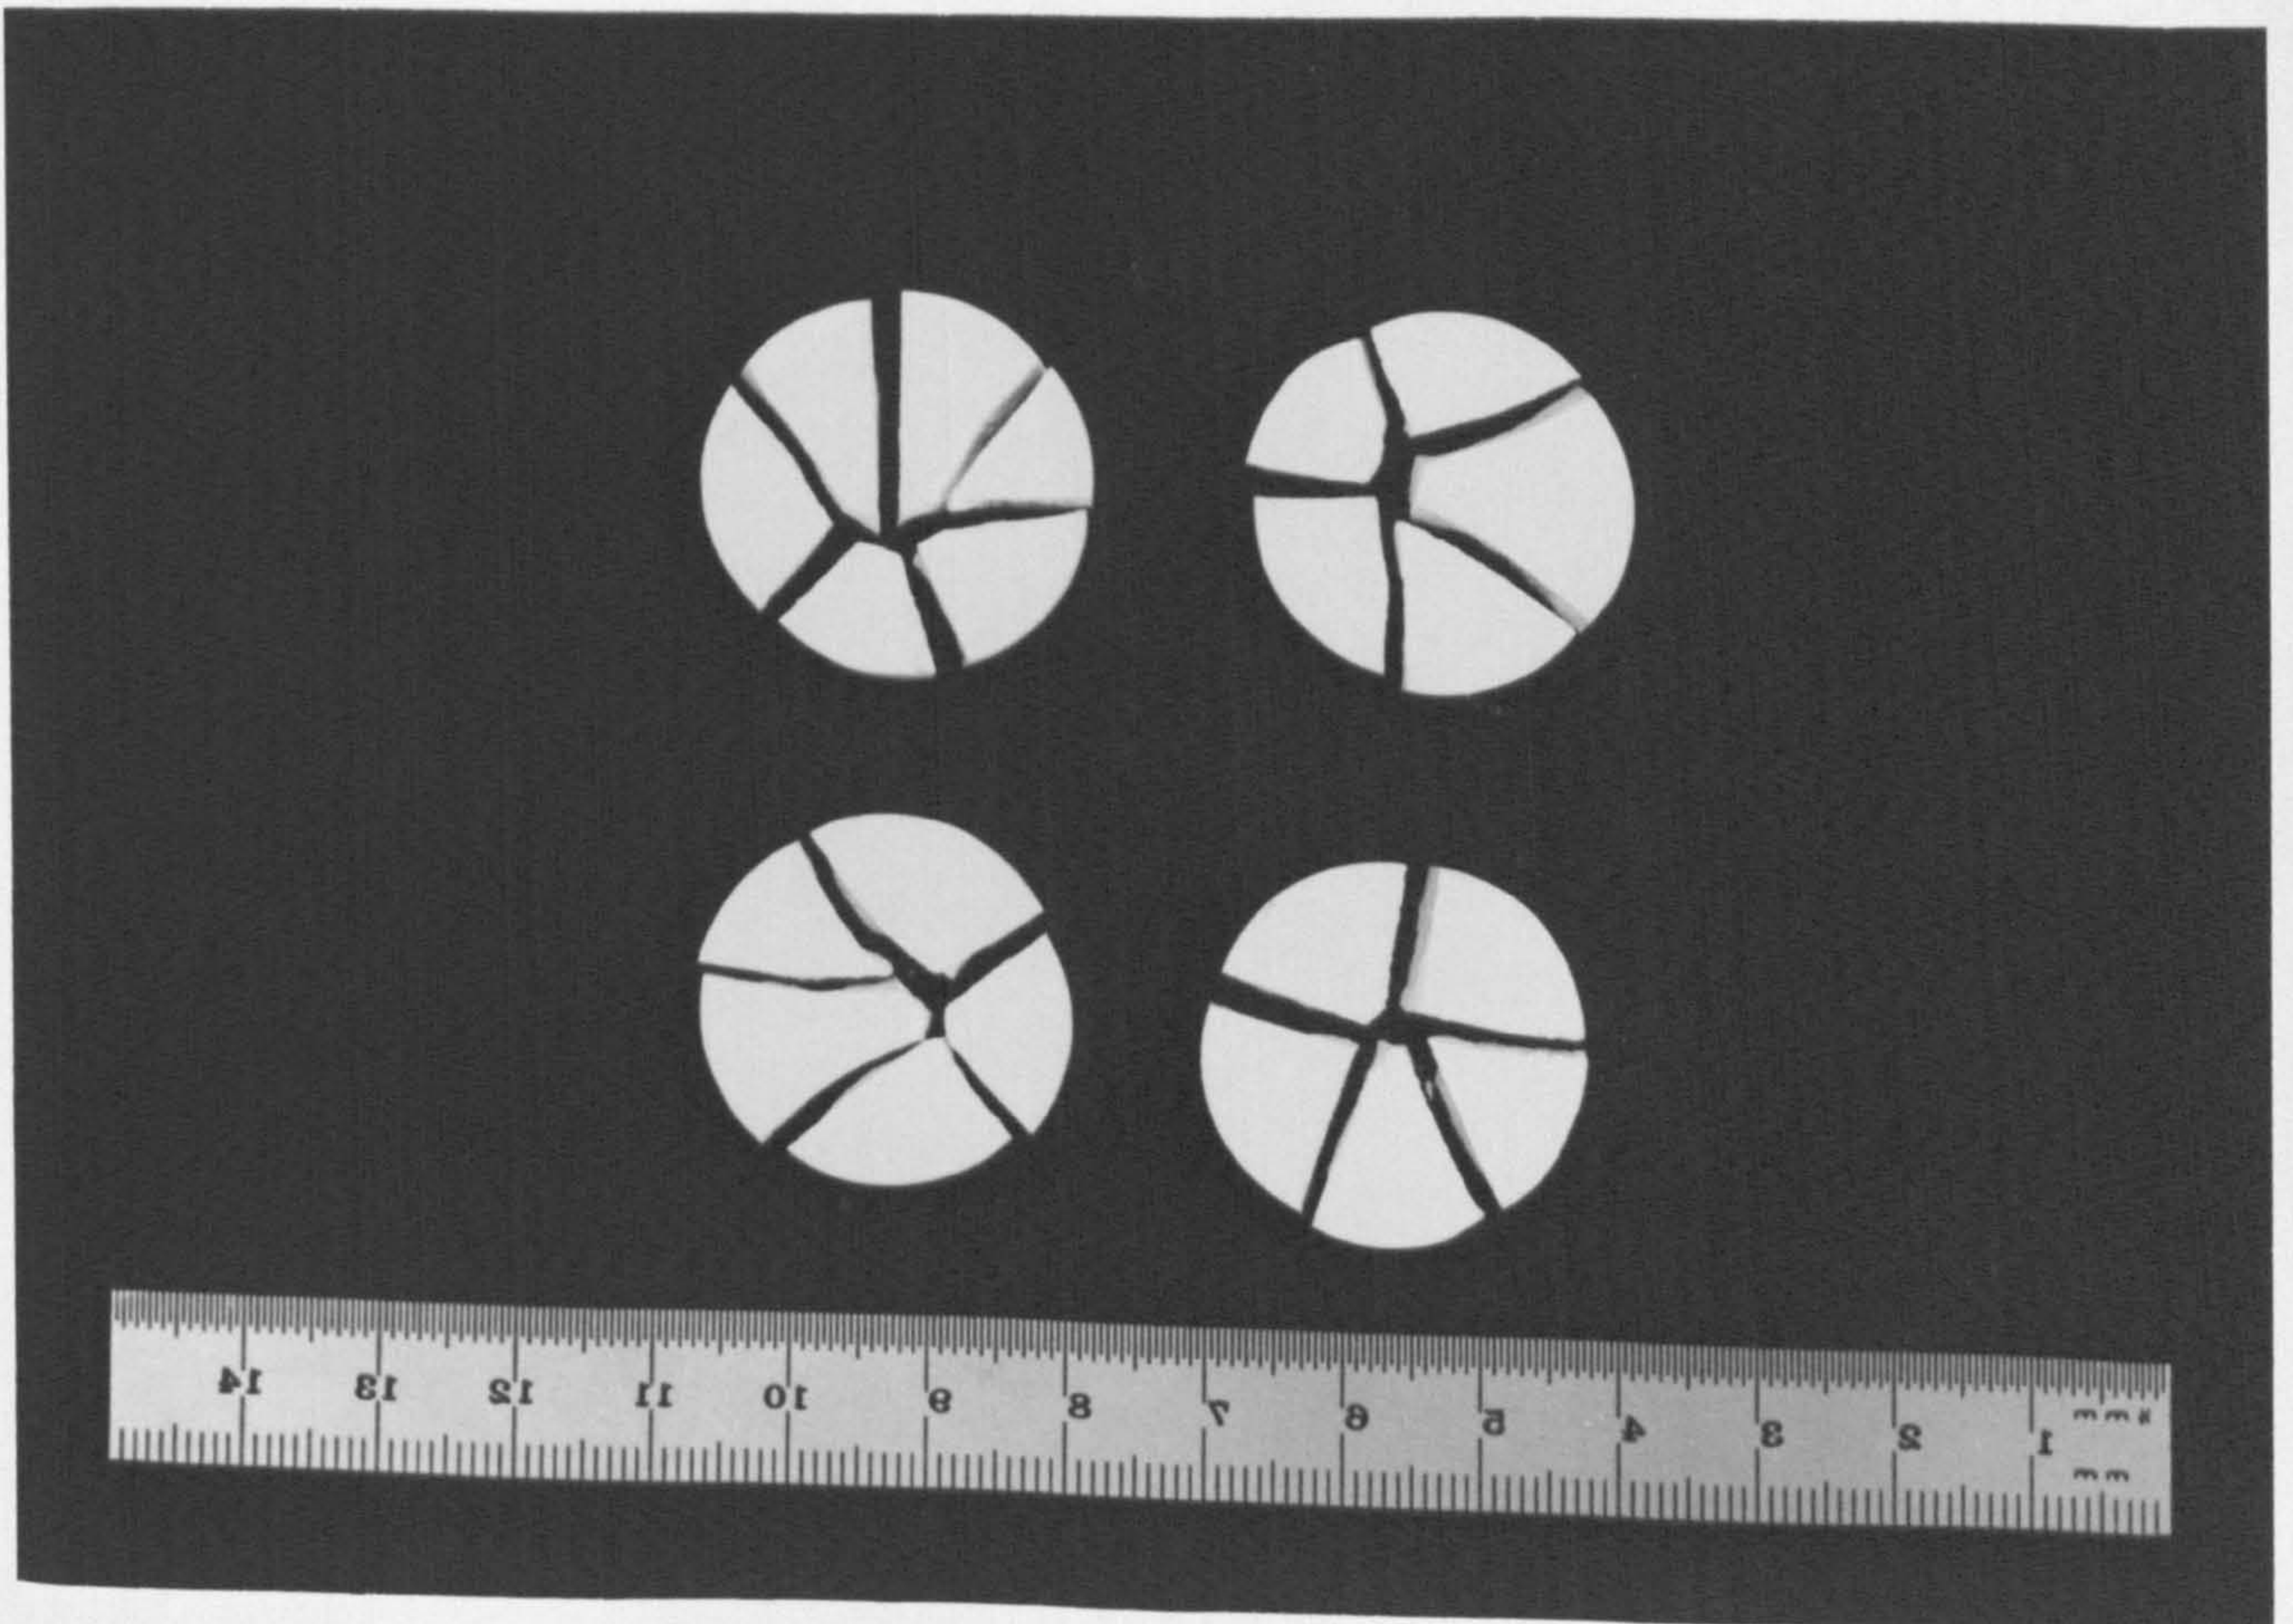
FRACTURE PATTERN IN RING-ON-RING DISC TEST SPECIMEN
